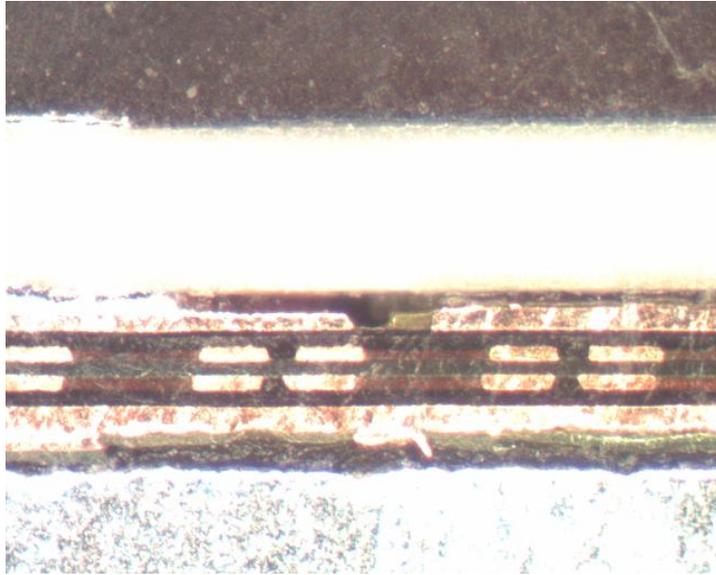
Void Under 2512 Resistor at Solder Pad on Hot Melt 1 Test Board, 1200 Cycles
